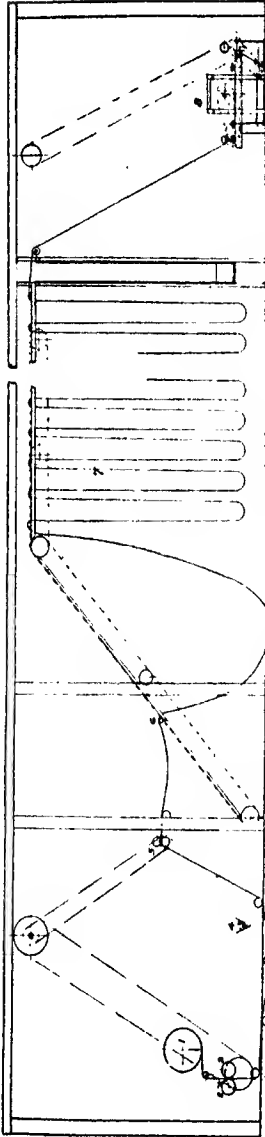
Coating Machine Used in the Intermittent Process of Manufacturing Roofing.
